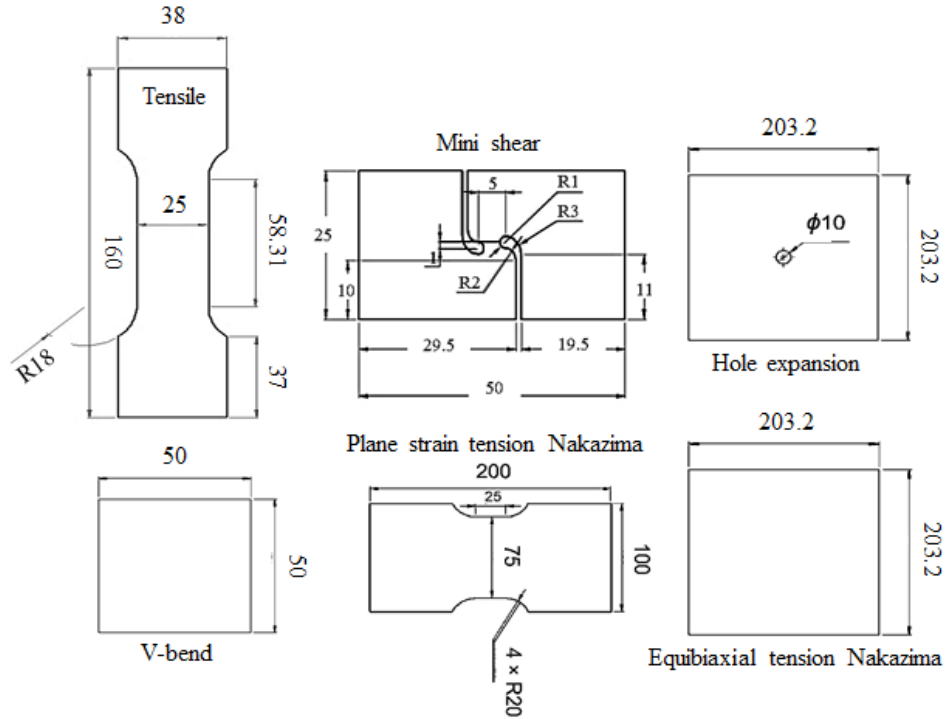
The geometries of testing specimens (unit: millimeter) [89], [196].
